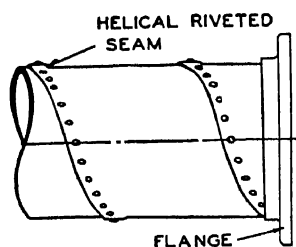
Spiral-riveted Light-wall Flanged Pipe.
